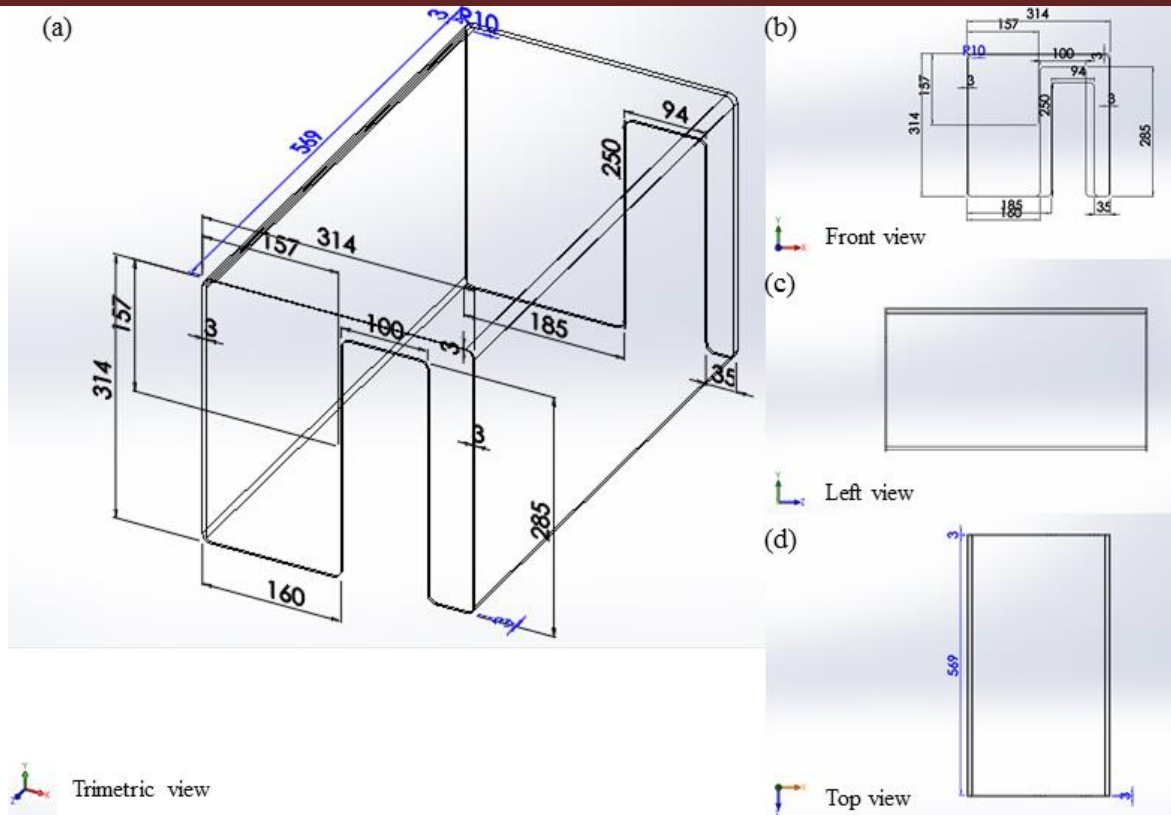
(a) Trimetric view, (b) front view, (c) left view, and (d) top view of system packaging for detection arm.
